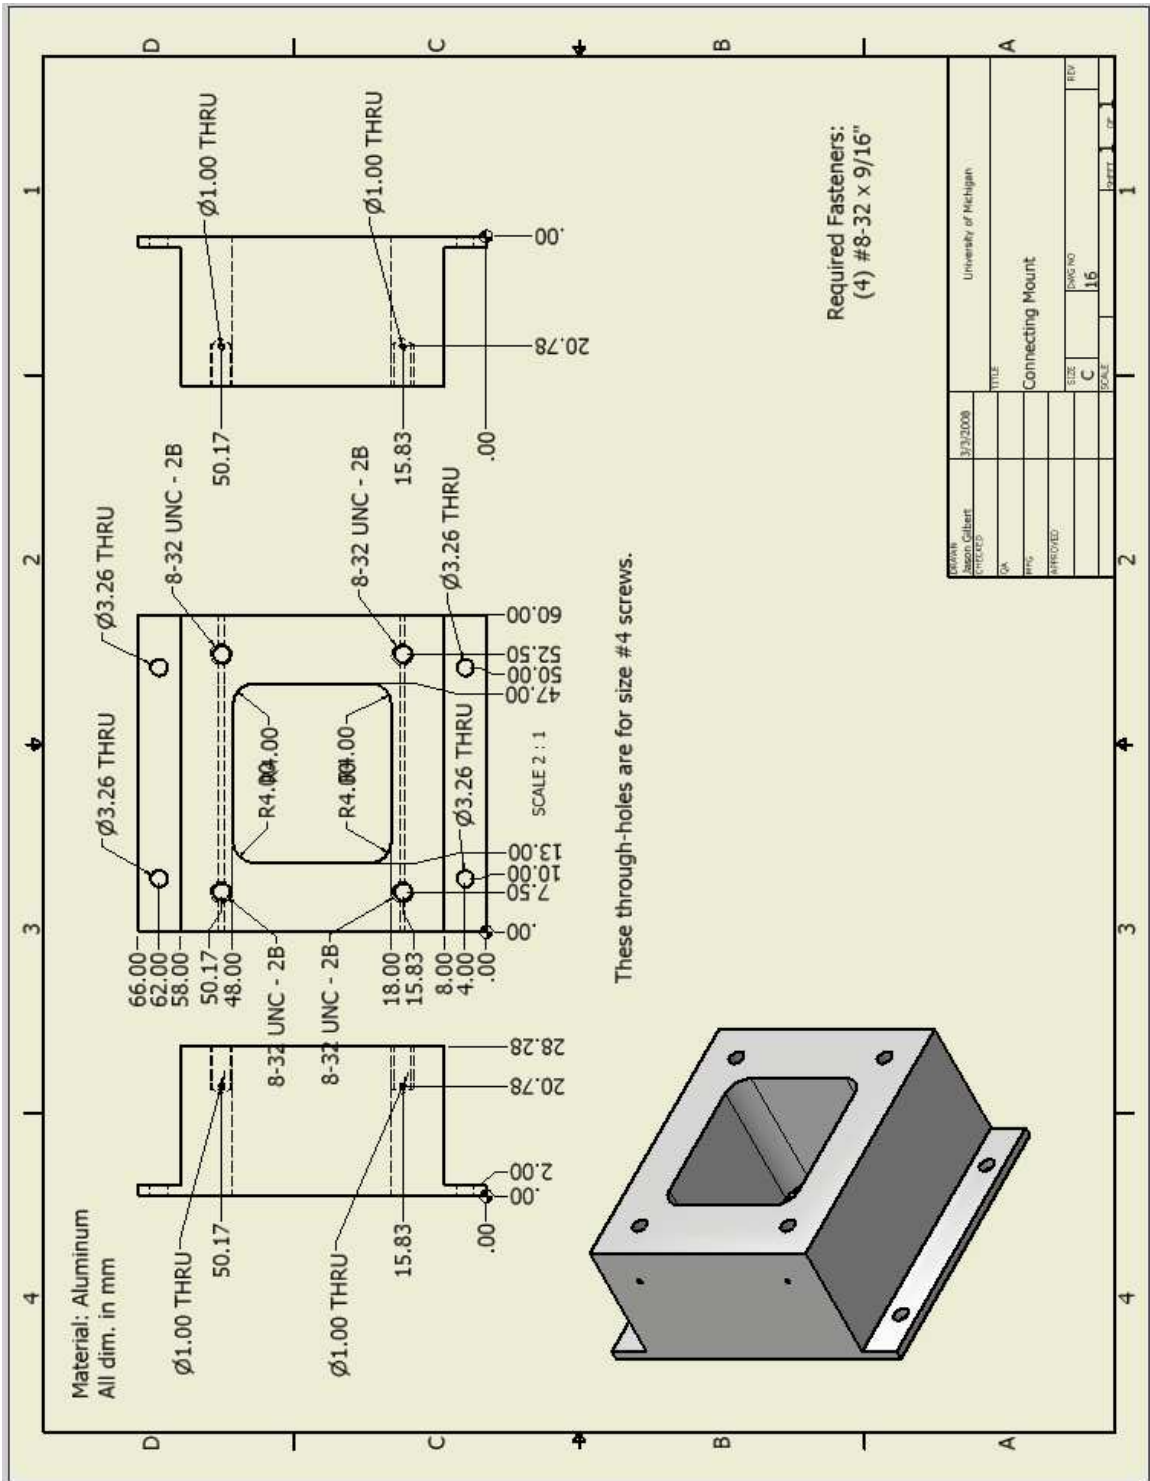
A mounting bracket for attaching IonSpec to the lab test setup.
